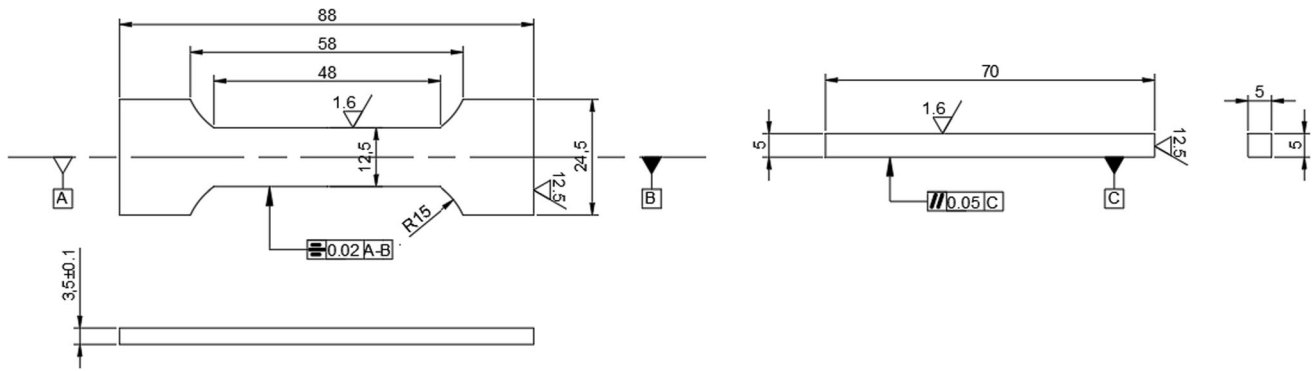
Specimen shape and size of tensile and three-point bending tests
